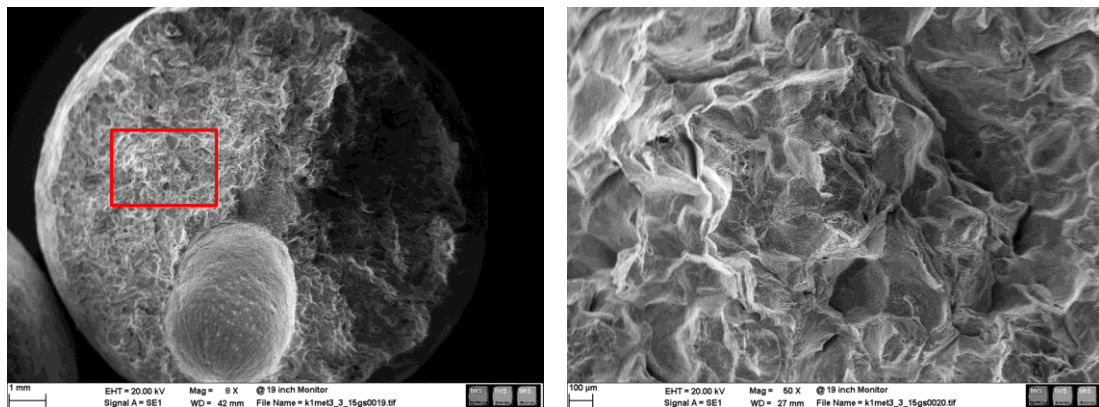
Fracture surface of specimen tested at 800°C (RA=37%)
